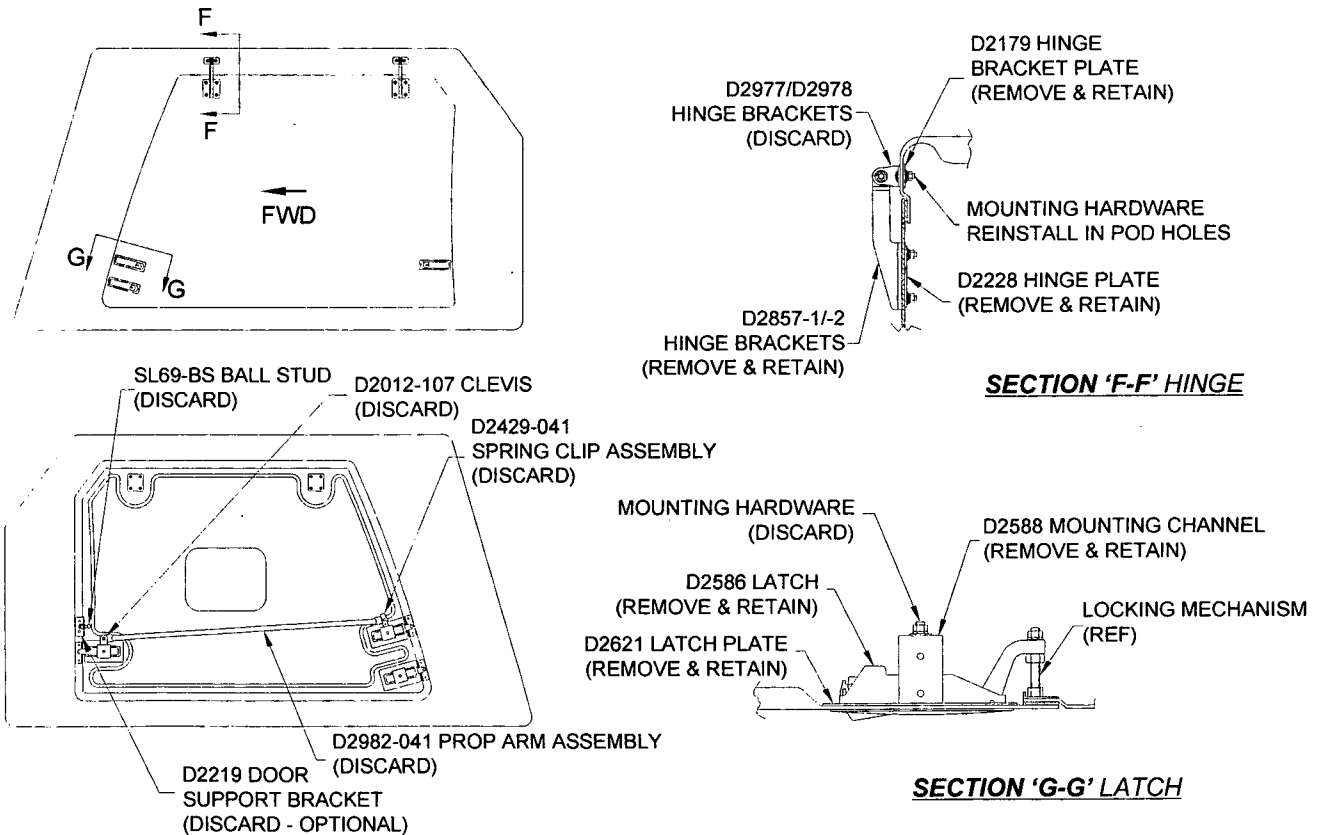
COMPONENT REMOVAL FROM EXISTING SPACEPOD KIT
